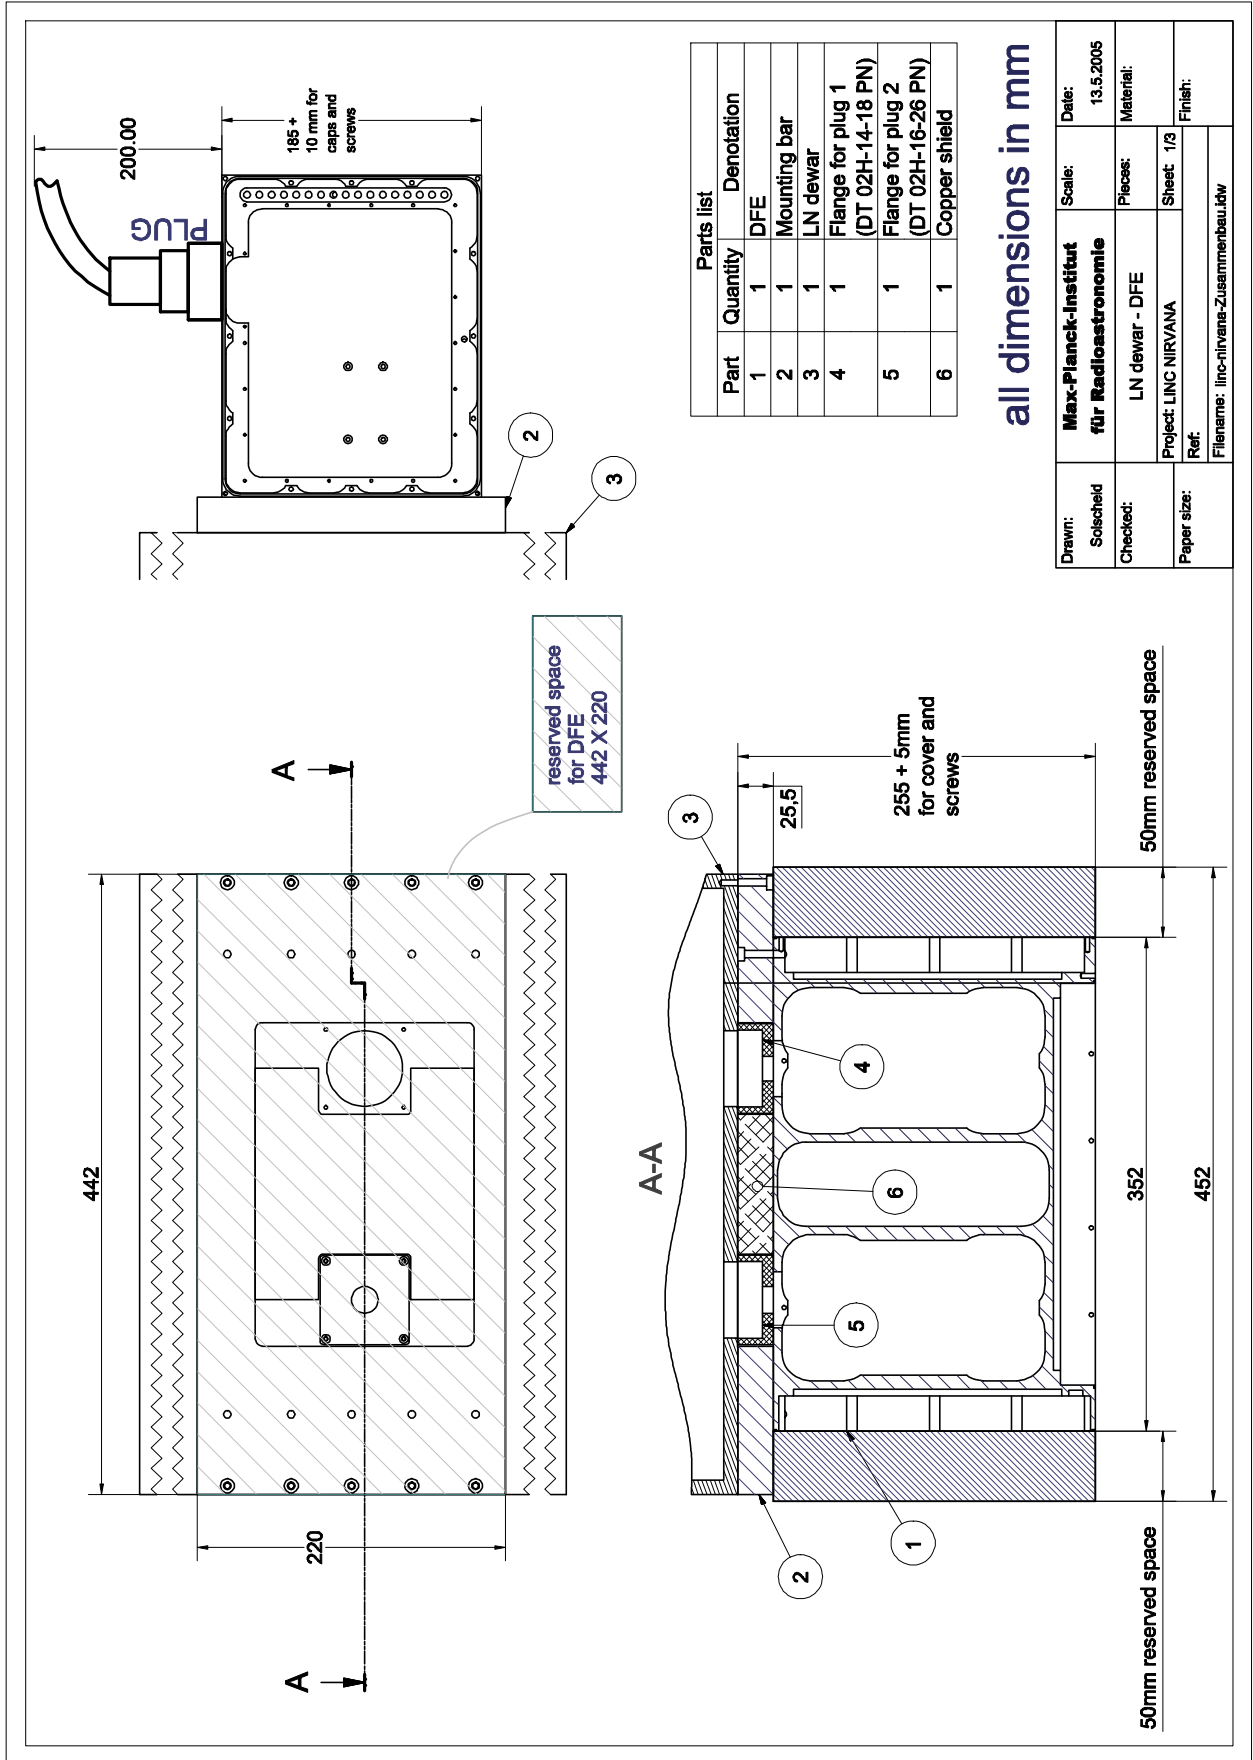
FFTS Detector Electronics housing, mechanical dimensions
